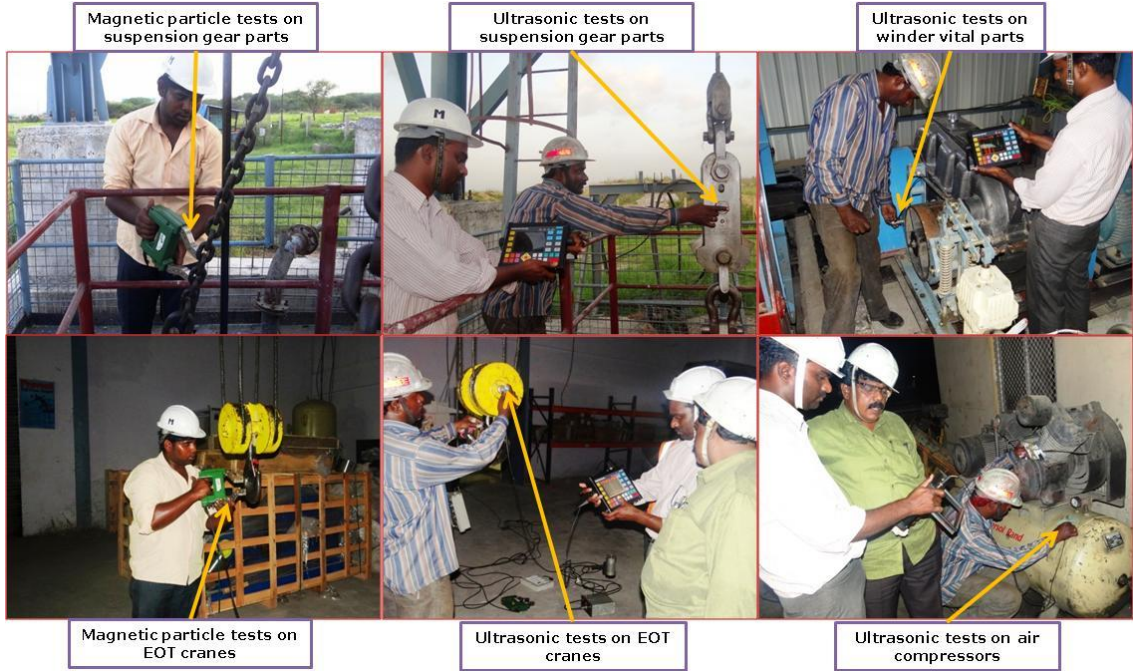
NDT on winder vital components, suspension gear parts, EOT cranes, and air compressors at Kayad mines, M/s HZL
